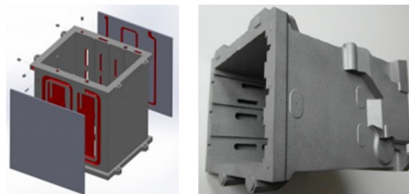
Exploded view of the solid model for the original brazed electrical enclosure (left, [6]) and the final printed part (right, courtesy of ASML).
